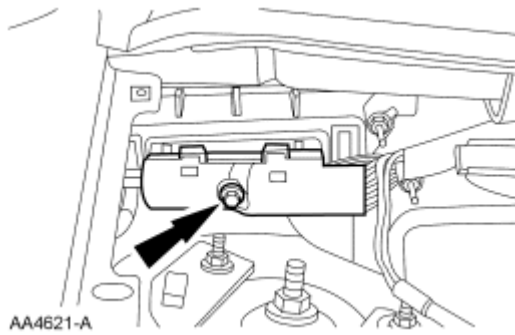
Powertrain Control Module (PCM) Connector Bolt
